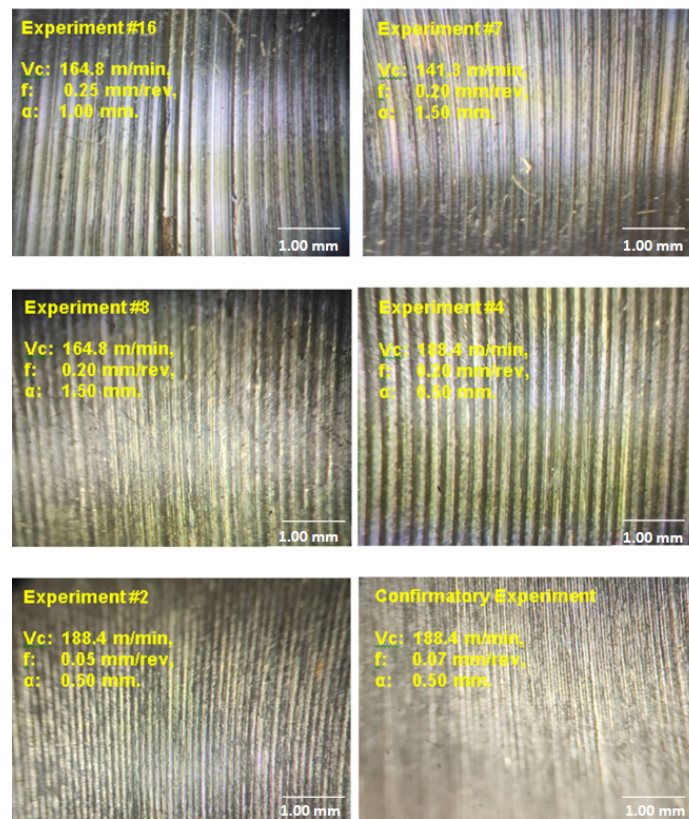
Indicative microscopic textures of machined surfaces during dry hard-turning of 60CrMoV18-5 cold-work tool steel.
